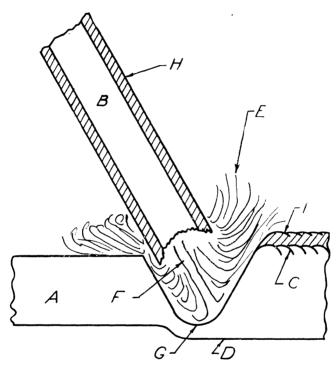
A coated electrode arc weld in the making: A Base metal, B Electrode, C Bead, D Penetration, E Reducing gas shield, F Arc stream, G Crater, H Coating on electrode, I Slag covering of bead
